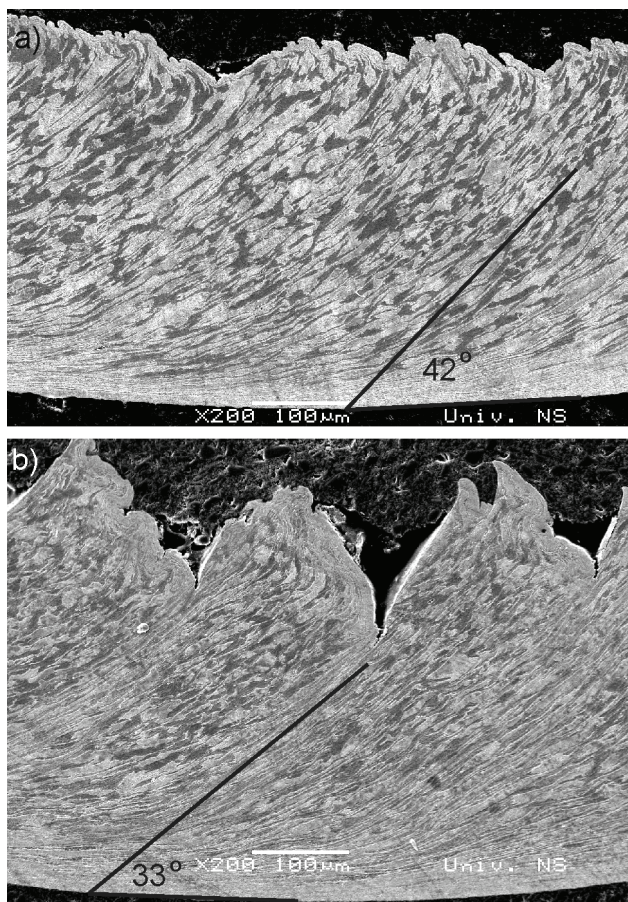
Chip cross section generated at 250 m/min cutting speed, feed rate 0,3 mm/rev, depth of cut 2,5 mm: a) new tool insert, b) worn tool insert
